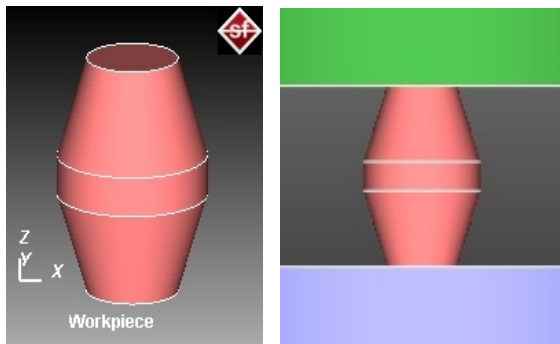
3D model – tapered workpiece and upsetting process [2]
